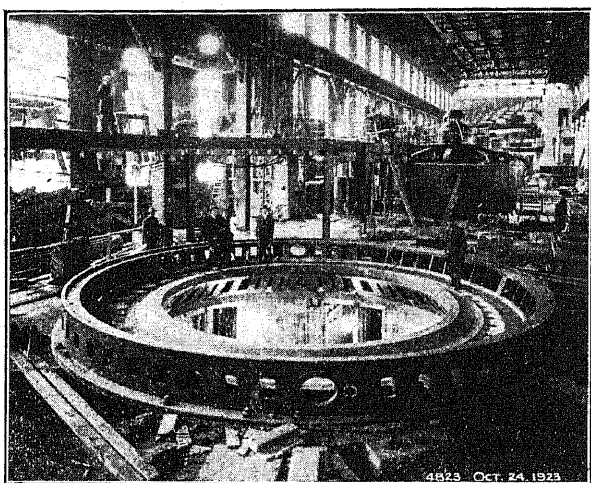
BASE RING (OUTER) AND BRAKE SUPPORT (INNER)
